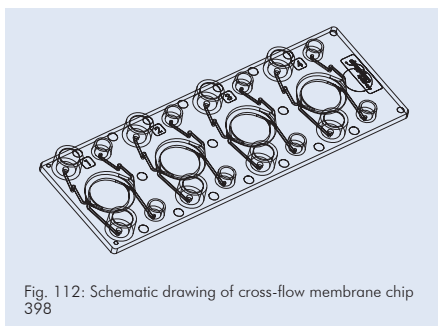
Schematic drawing of cross-flow membrane chip 398
